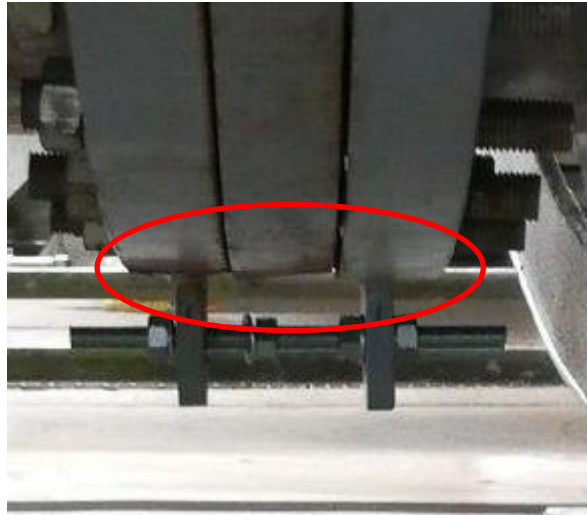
Flange Y with spacer ring inserted following the removal of the blanking plate. Very small alignment issue visible.
